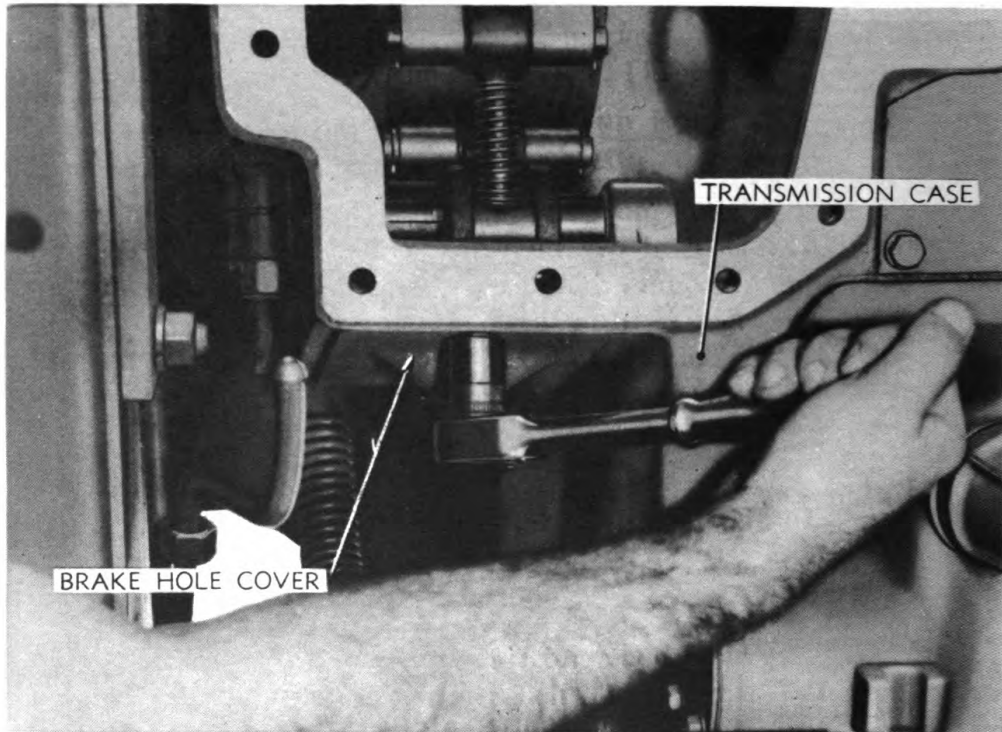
Removing Steering Clutch Throw-out Fork Equalizer Bolt
